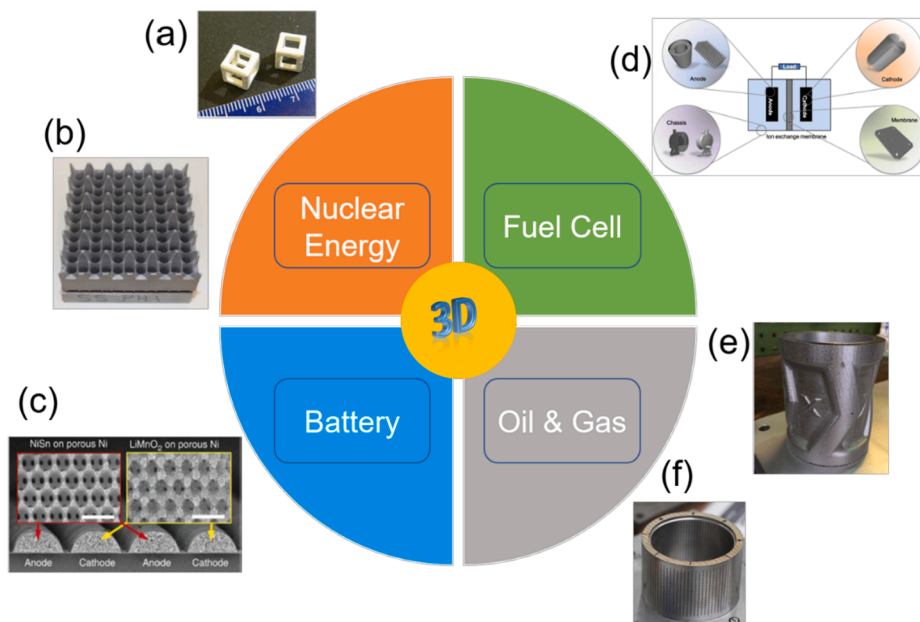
AM-fabricated materials, components, and products in four major energy sectors. (a) Thorium dioxide nuclear fuel fabricated with a stereolithography-based AM technique [13]. (b) Nuclear fuel assembly debris-filtering bottom nozzle 3D printed by Westinghouse [14]. (c) Interdigitated electrodes of a micro-battery fabricated using template-assisted electrodeposition [15]. (d) Membrane and anode components of a microbial fuel cell were fabricated with fused deposition modeling [16]. (e) A nozzle component used metal AM to include down-hole cleanouts of oil and gas well-bores made by EnergyX [17]. (f) Masoneilan control valve parts with special configurations were fabricated with metal laser sintering by GE Oil and Gas [18].
